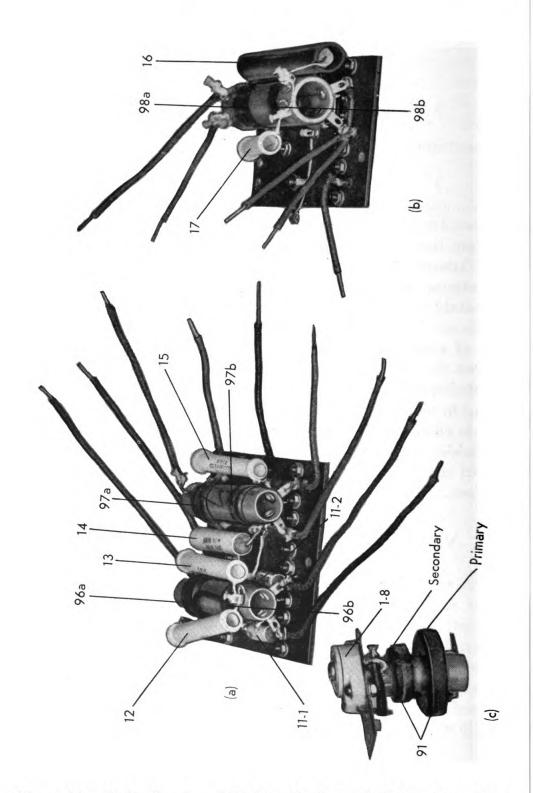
Radio Receiver BC-792-A, Oscillator Coil Sub-Assemblies, Typical R-F Coil Assembly
